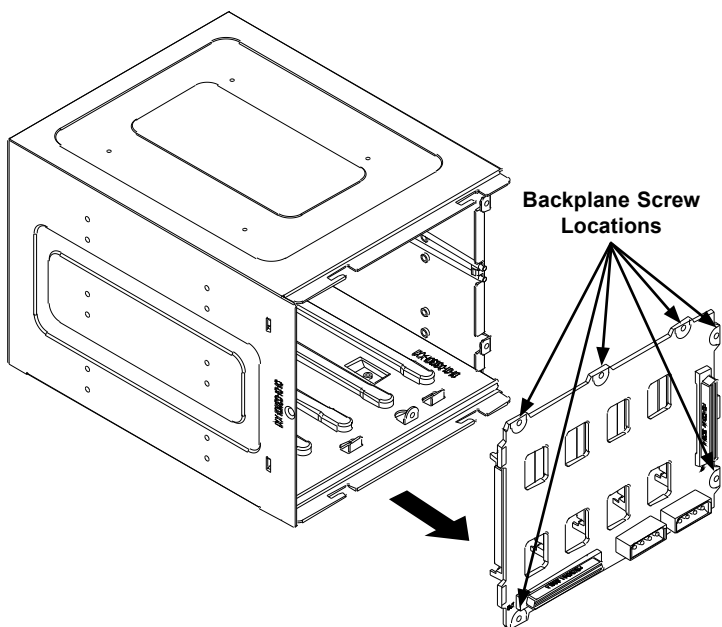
Removing the Mobile Rack Backplane (Optional)
